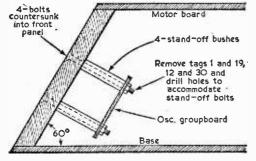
The method of mounting the oscillator group board on the front panel of the cabinet.
